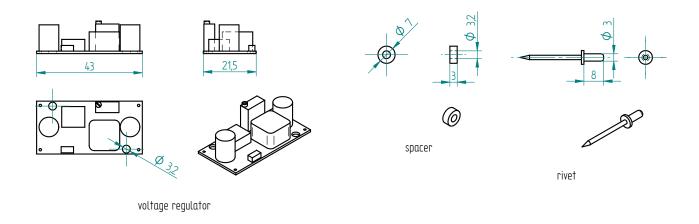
power unit p/housing/voltage regulator parts drawing
